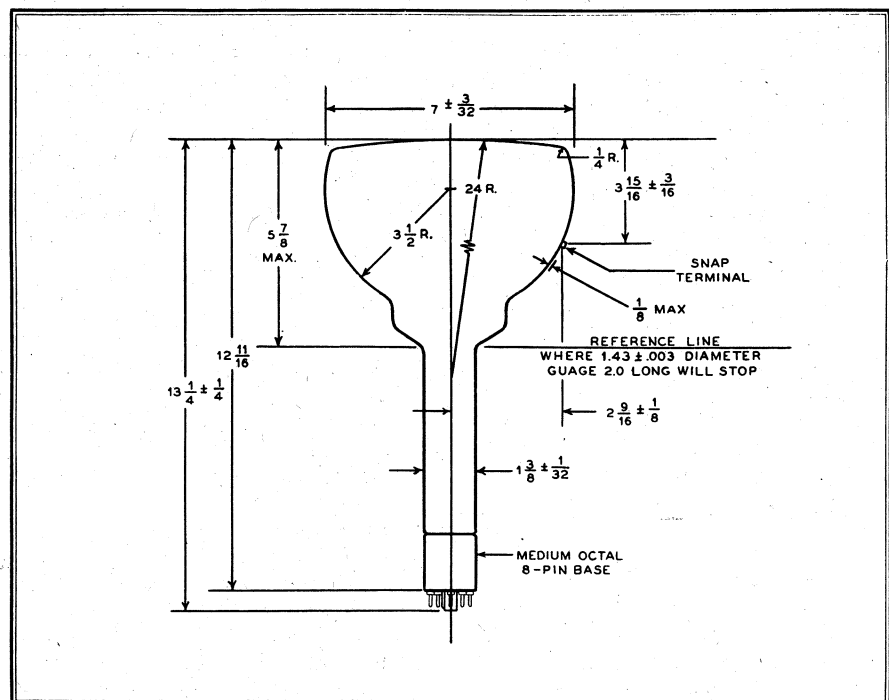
TYPICAL MAGNETIC TYPE TUBE, SHOWING DIMENSIONS IN INCHES
